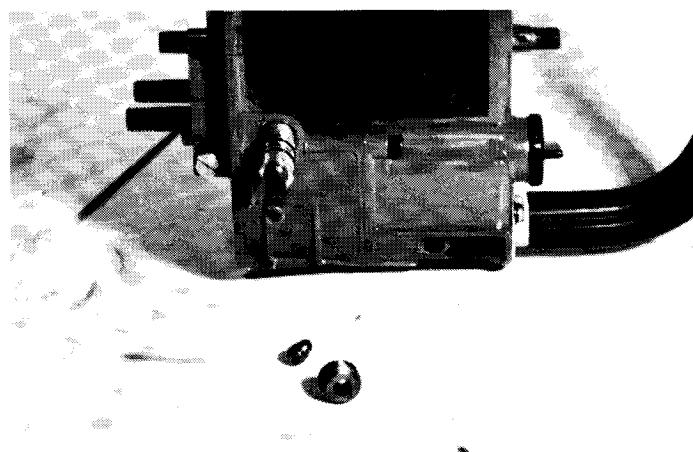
To remove the oil pump. First remove screw 1 using a allen key and then screw 2 using a screwdriver. Screw tool no. 9135 onto screw 3 and pull out the oil pump.
